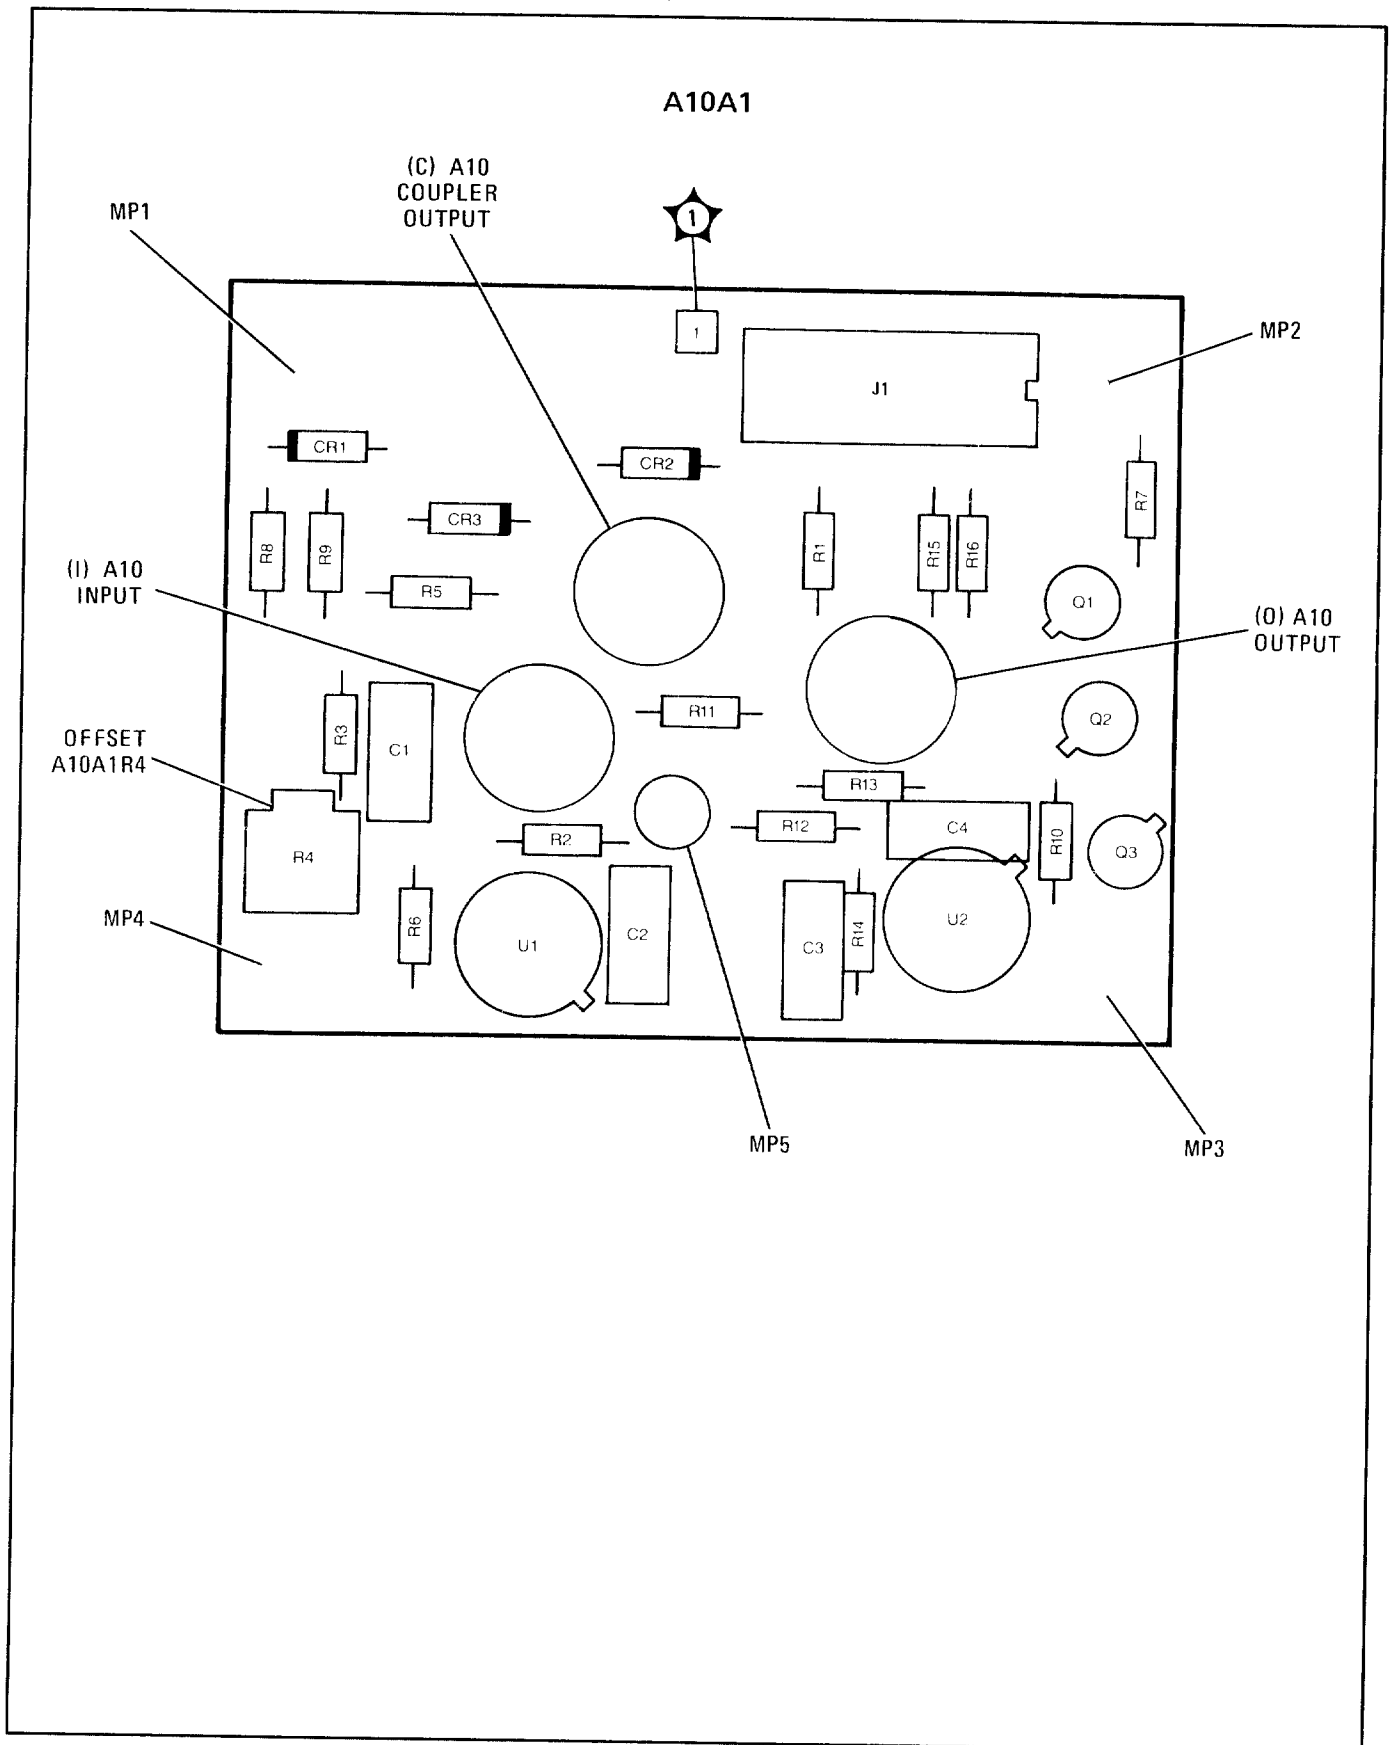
A10A1 YTM Bias Control Assembly, Component Locations (CHANGE K)
